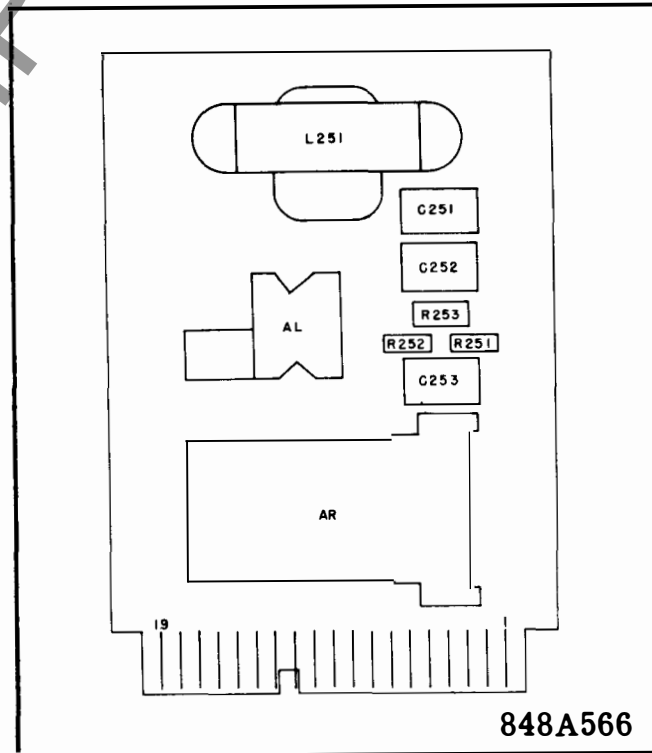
Component Location on Relay Printed Circuit Board for Type SKBU Relay.
